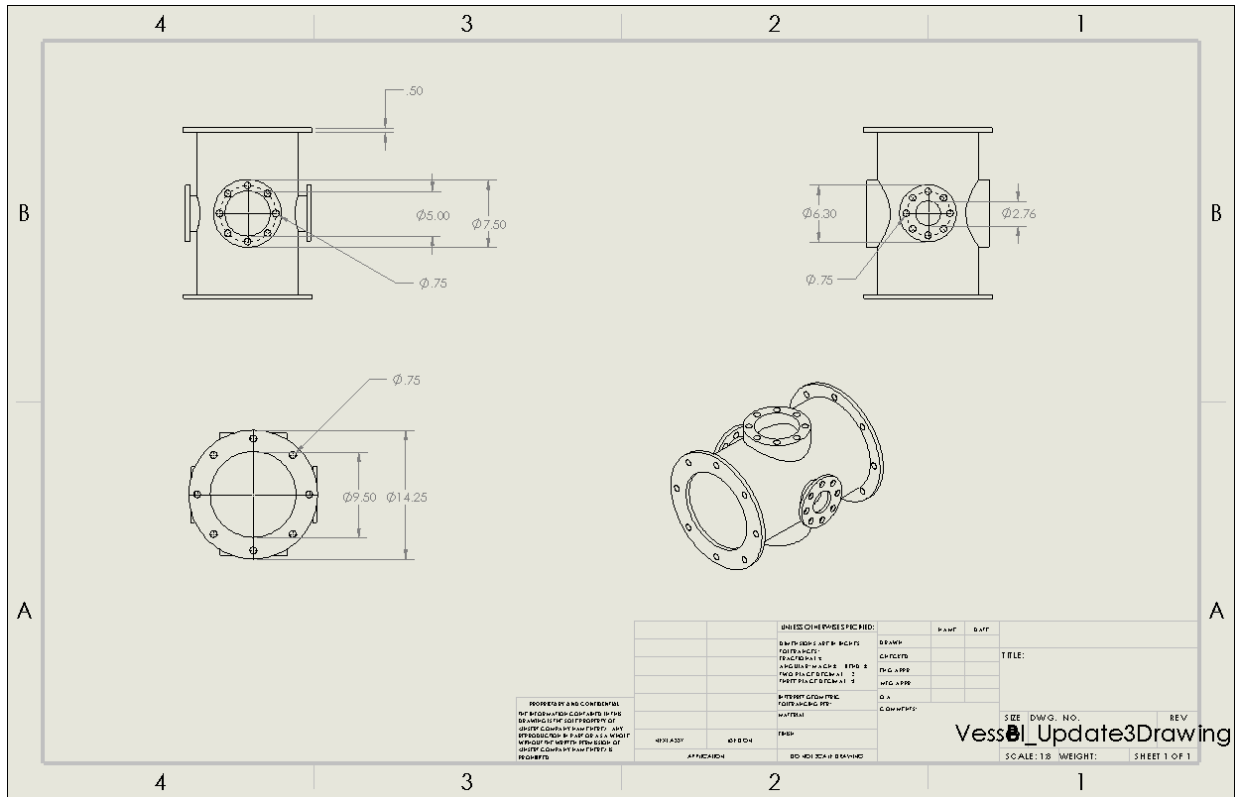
2D CAD Drawing for Vessel Body in Inches
